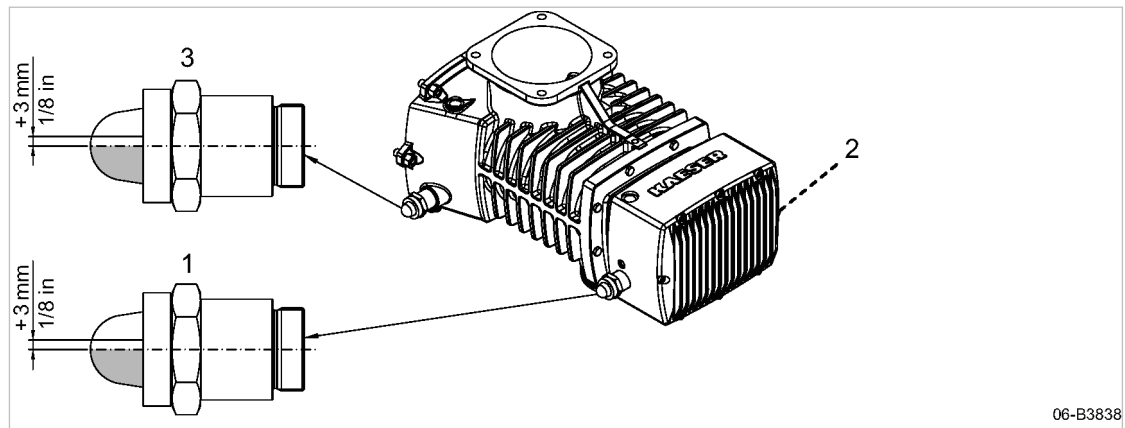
Adjusting lubricating oil level in longitudinal direction (motor shaft)
